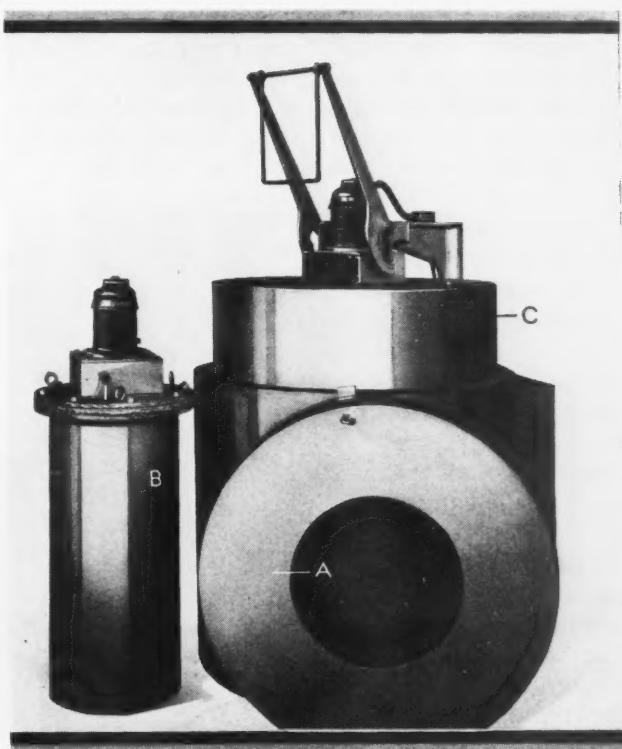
Furnace Shown in Fig. 2 with the Ring Cover and Retort Used in Nitriding Removed and the Air-drawing Cover in Place
